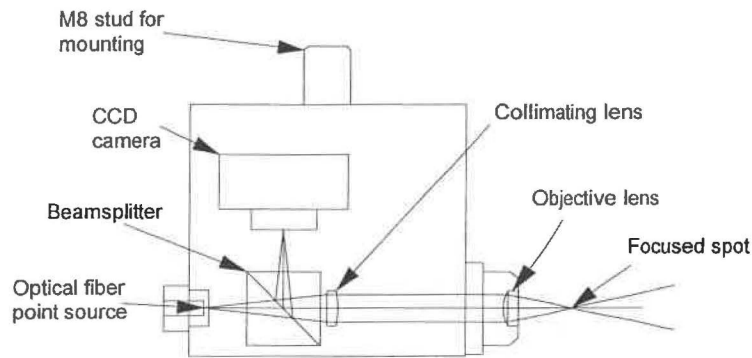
PSM optical sensor used in place of a touch-tip probe shown approximately full size.
